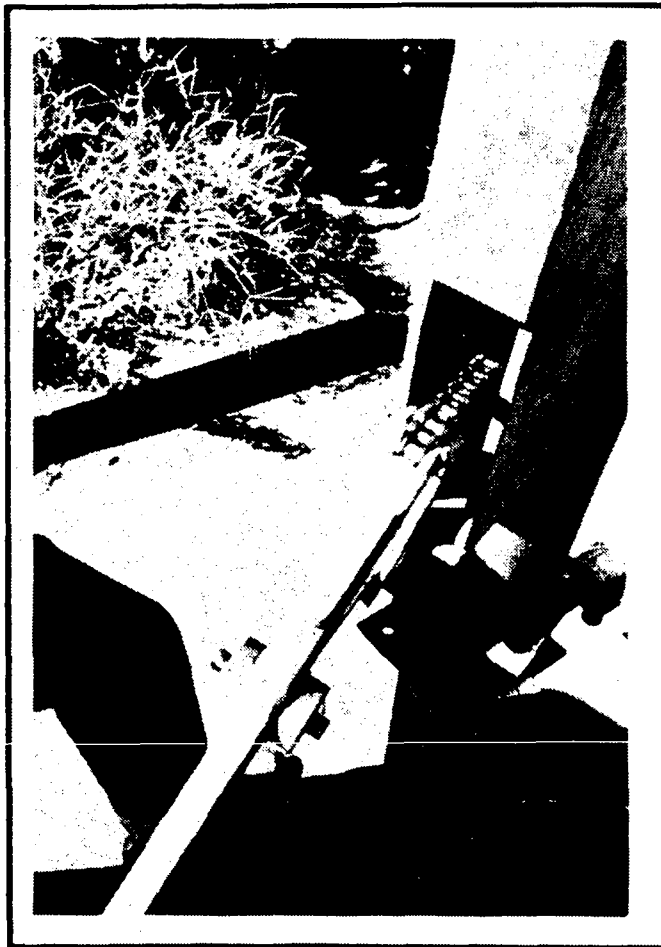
The handle pivot assembly consists of a steel pin with a snug fit through two bushings on the handle. This fit is necessary to ensure that the pin may be removed to service the below-ground parts of the pump.
